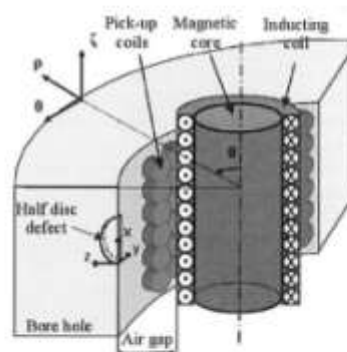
Scheme of a flawed cylindrical fastener and of a multisensor EC imaging probe.
